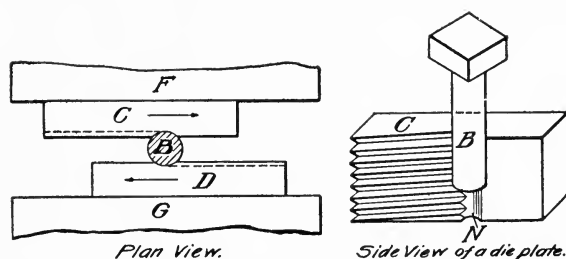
Dies for Rolling Threads on Bolt Ends.
